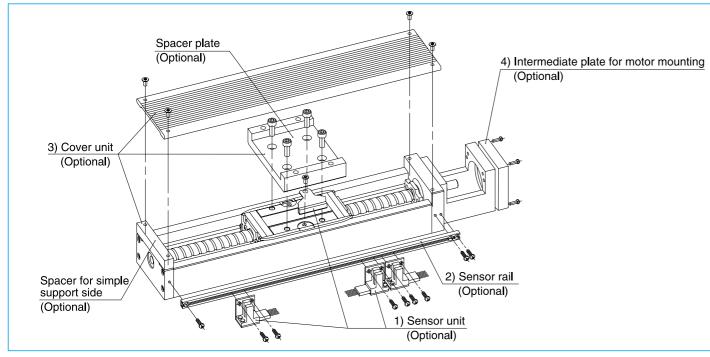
Assembly: Accessories for MCH10 (example)
